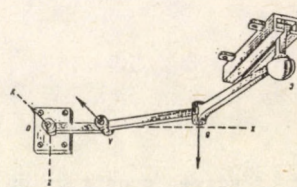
Stereoscopic cranked mechanism consisting of five members
